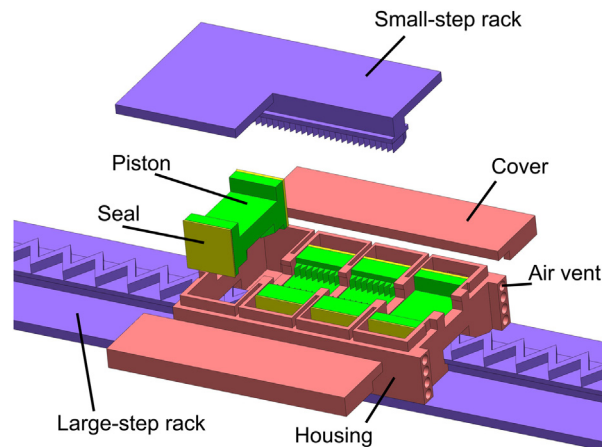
Dual-speed stepper motor design. The top rack has pitch 0.3 mm, the bottom rack has pitch 1.7 mm.
